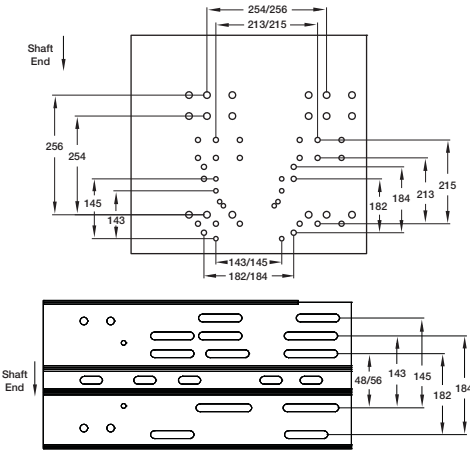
Motor Mounting Positions Based on Motor Frame Size
